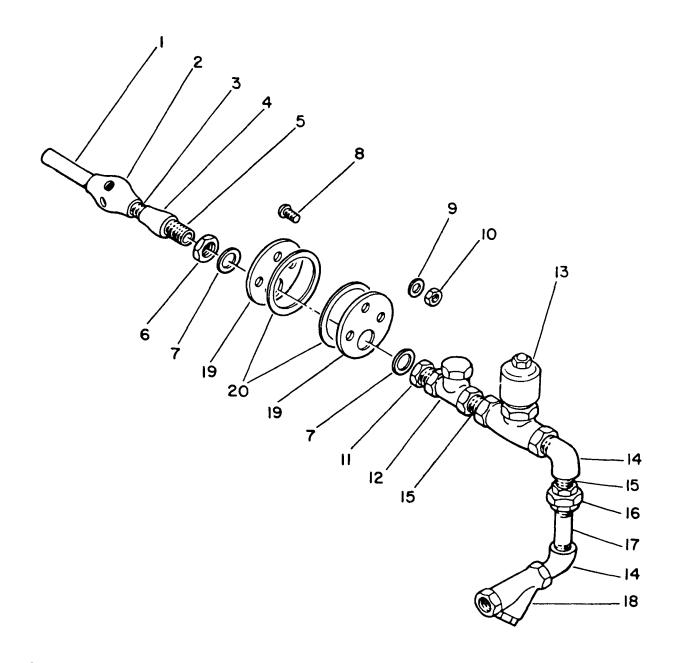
STEAM COIL ASSEMBLY (W-3-13129)
